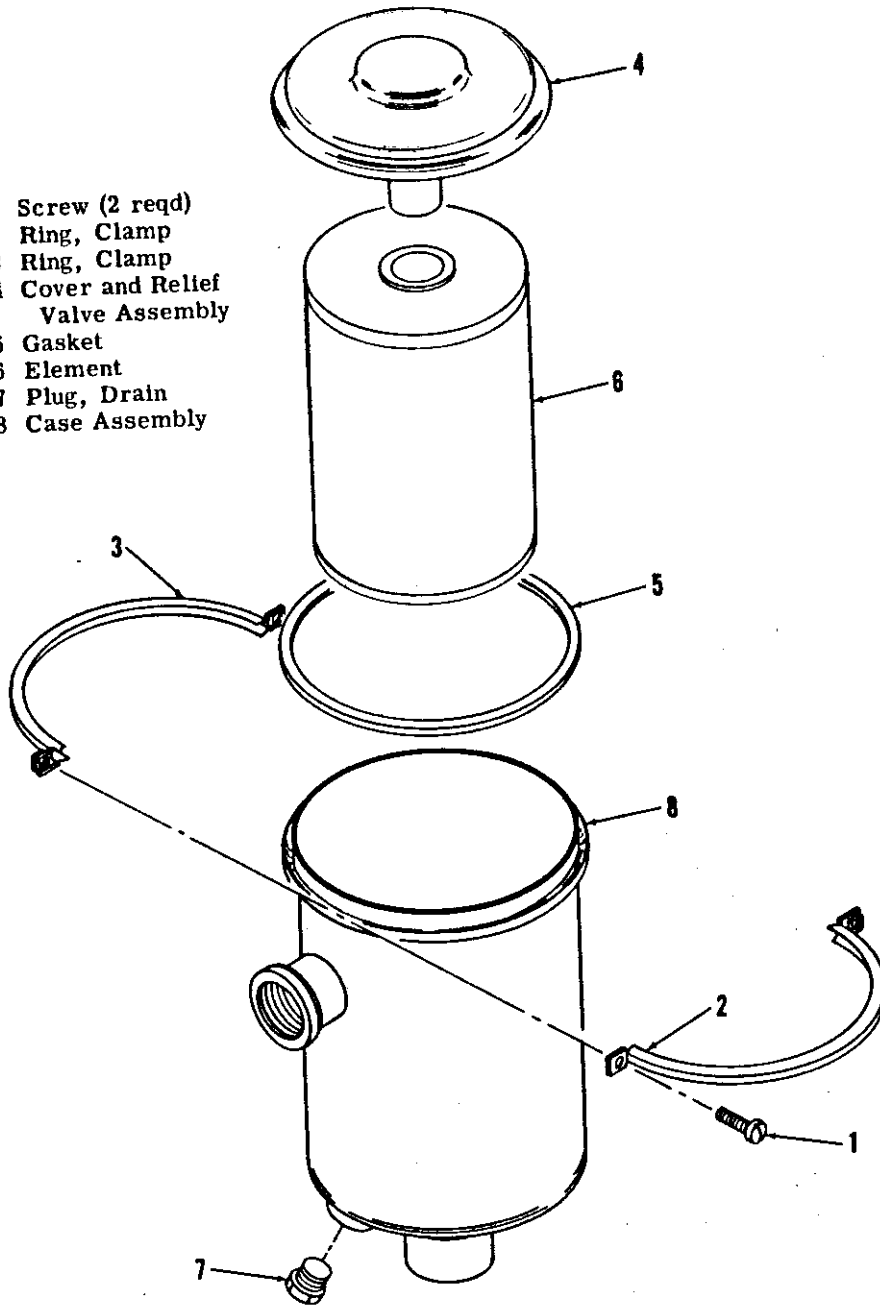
Compressor Oil Filter, Disassembly and Reassembly
